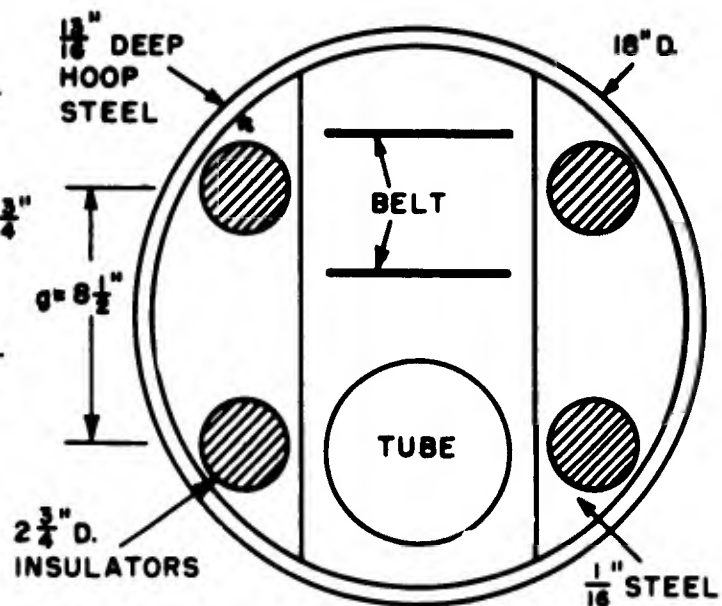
Cross Section of 6' long column to consist of 3 divisions with hinged connectors between. Each division is 25" long with 20 sections.
